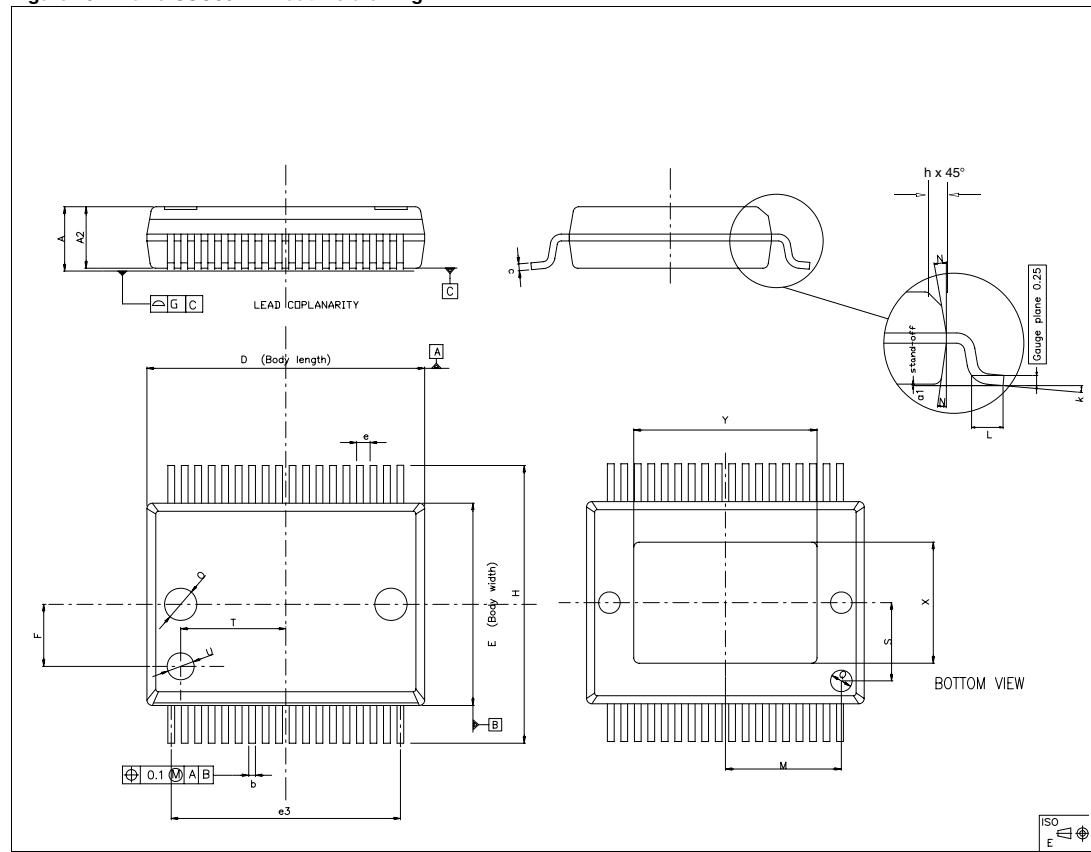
below shows the package outline and *Table 8* gives the dimensions.
